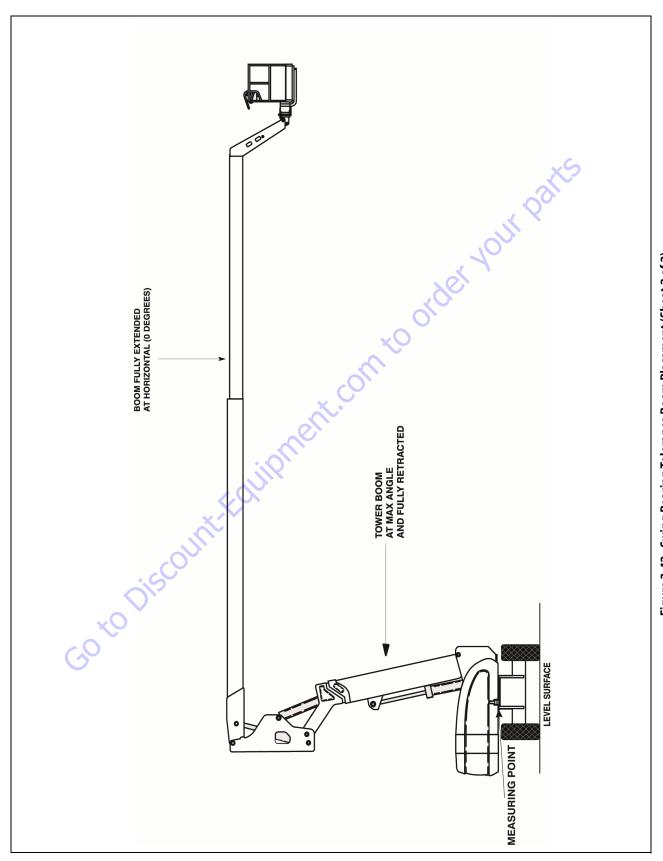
Swing Bearing Tolerance Boom Placement (Sheet 2 of 2)
